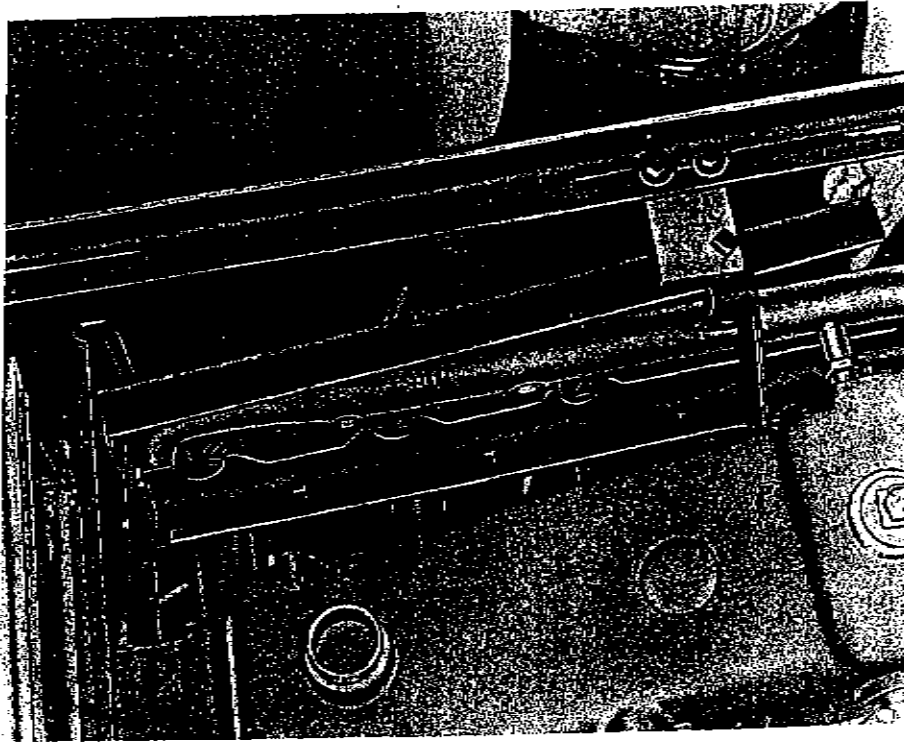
Removing Left Side Outer Exhaust Manifold Jacket
